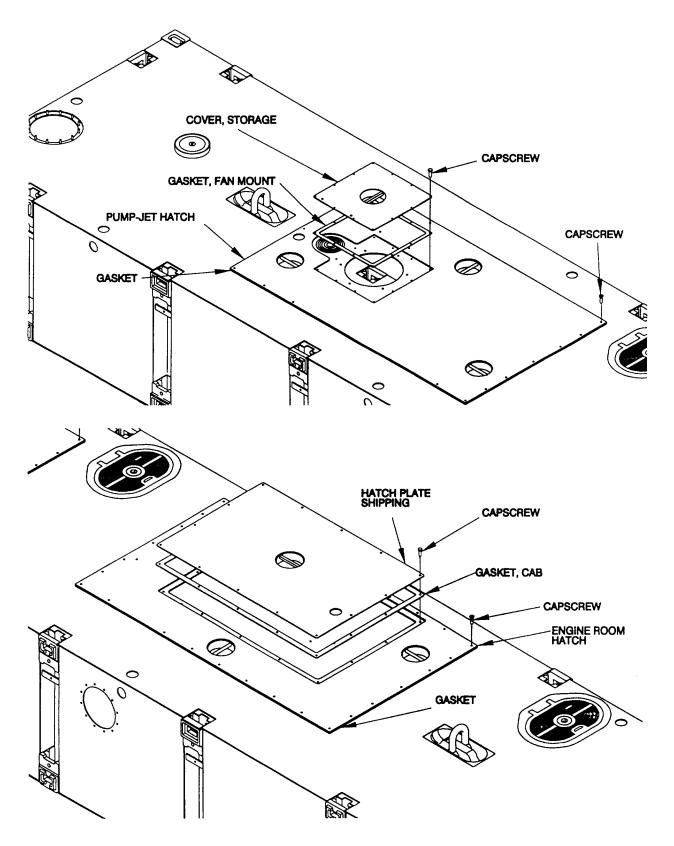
Propulsion Module/Powered Section Assembly (Operator's Cab - View A). (Sheet 2 of 11)
